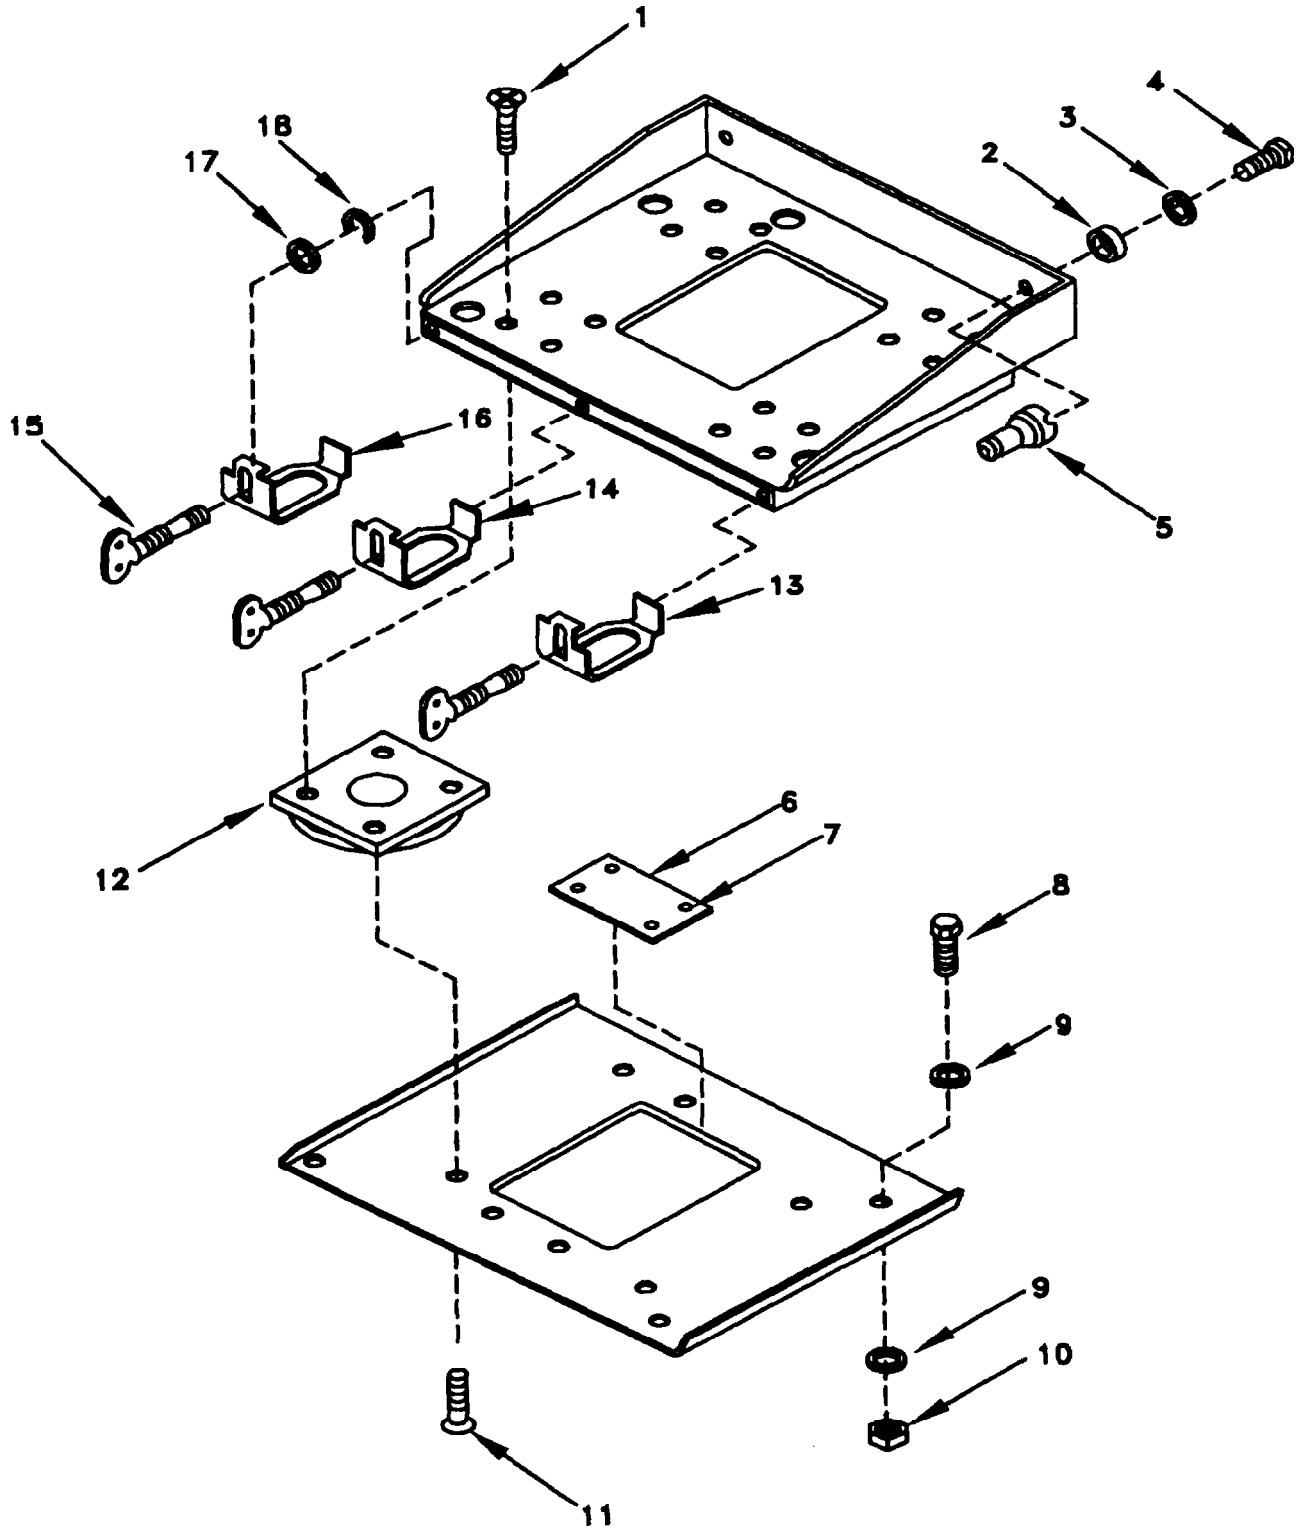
MOUNT MT-6845NRC (Sheet 1 of 2)
